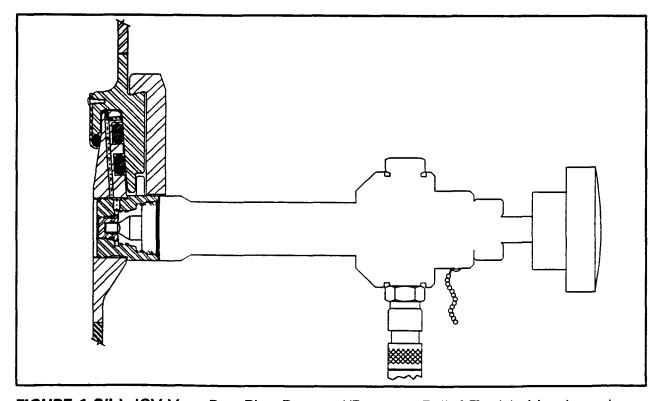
(b) ICV Vent Port Plug Removal/Pressure Relief Tool (with adapter)
